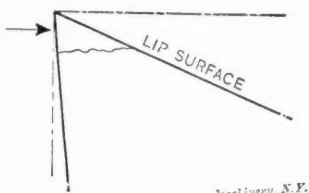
Spalling of Tool-point by Pressure on Clearance Flank due to Feeding Tool into the Work.
